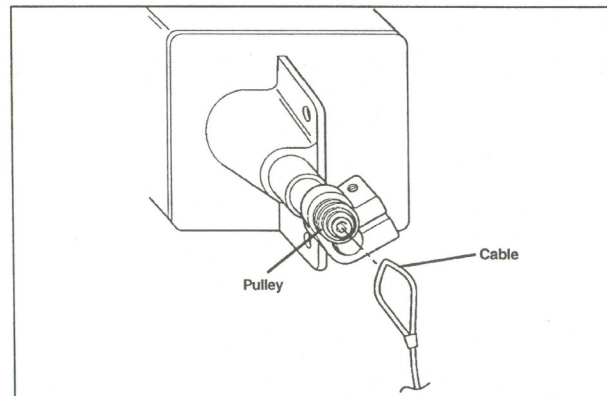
Loop cable end over pulley of upper crank handle assy.
